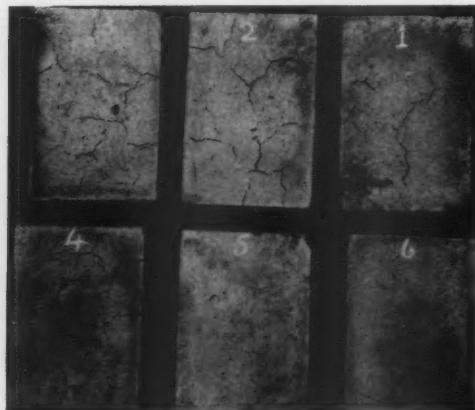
SPECIMEN CASTINGS OF TABLE 6. CASTINGS ARE SHOWN AS REMOVED FROM THE MOLDS AND CLEANED BY MEANS OF WIRE BRUSHING.
